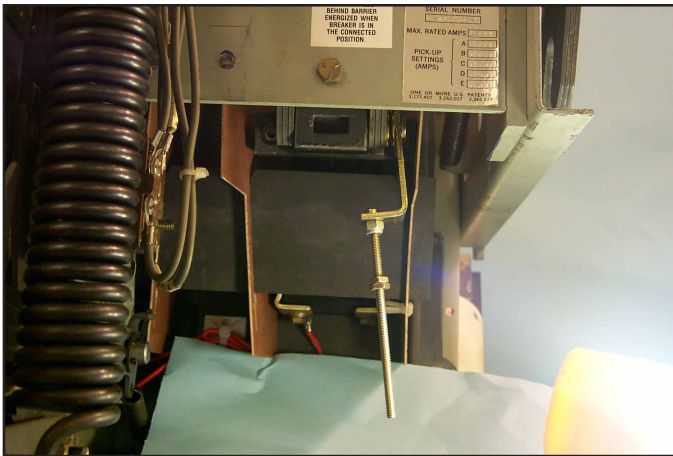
Overview: Reset Link Assembly Installed on the Closing Mechanism.
